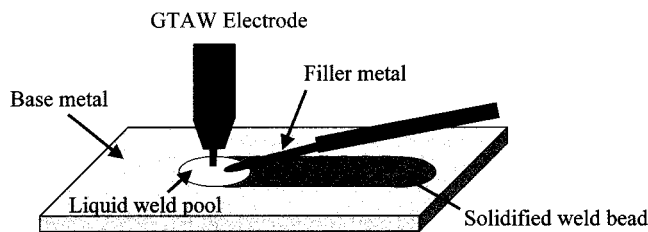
Schematic of the GTAW process for producing the dissimilar metal welds.
